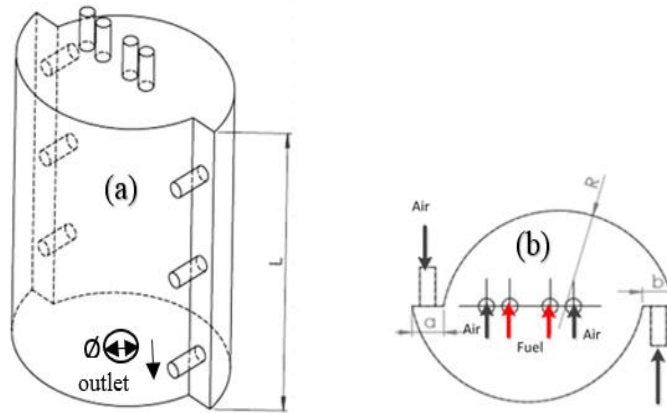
The design of mesoscale combustor flameless combustion (a) isometric view (b) top view.
